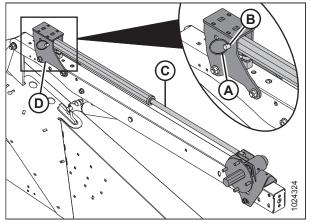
Left Reel Arm Cylinder in Forward Position
